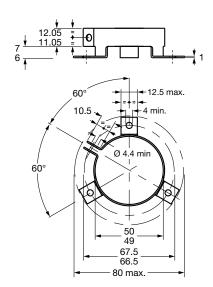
Dimensional outline of clamp for case \emptyset D = 50 mm
